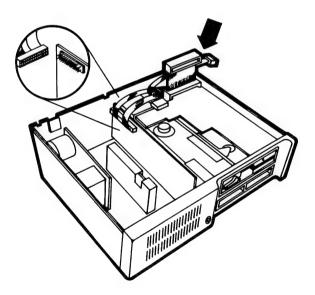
New signal cable connections to PCjr. disk drive & controller card
